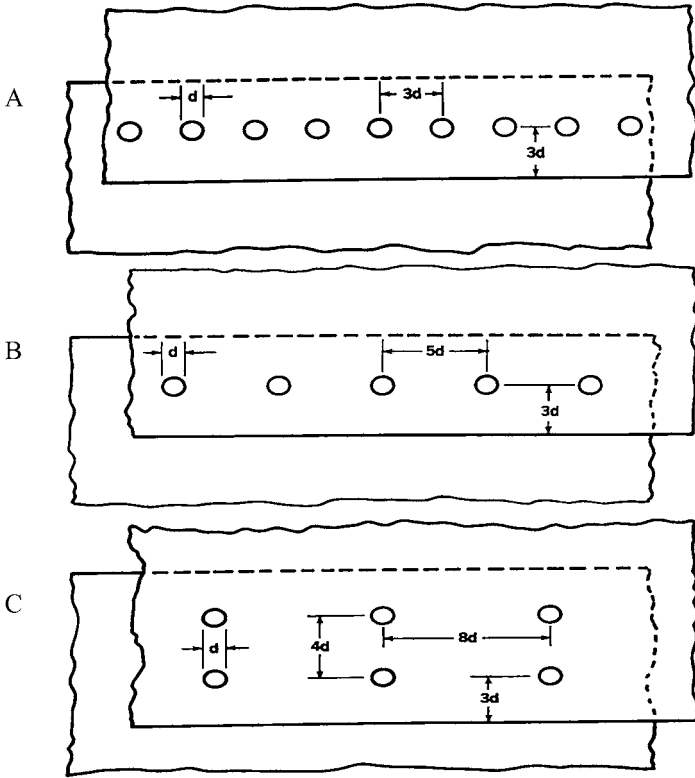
(a) Single-row joint geometry for tension failures; (b) single-row joint geometry for bearing failures; (c) two-row joint geometry for bearing failures.
